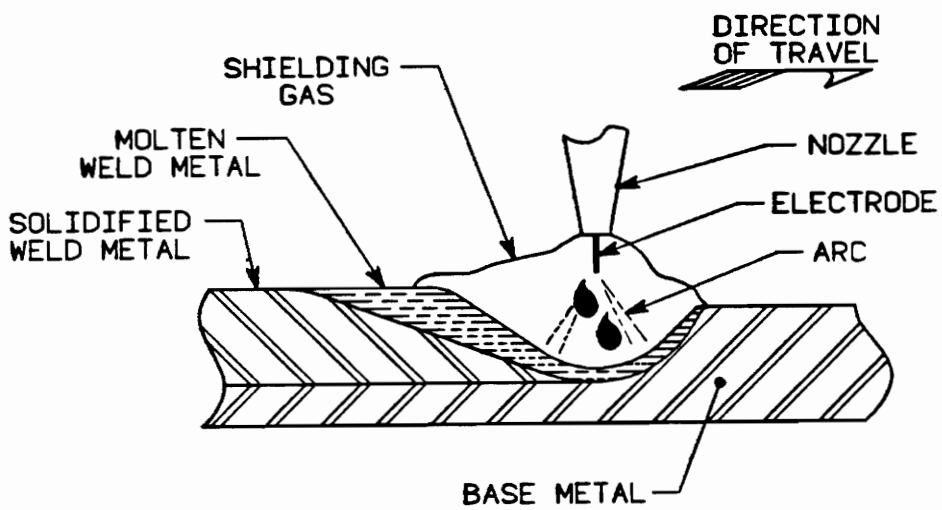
Gas Metal-Arc Welding Process Diagram [1, p.145].
